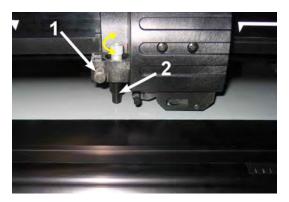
REMOVING THE DRAG KNIFE HOLDER FROM THE CLAMP
